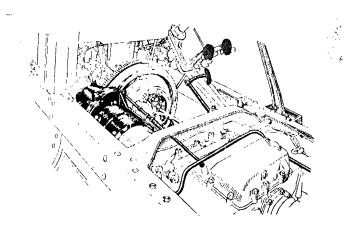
Sketch showing how the simple series type is geared up to engine.
